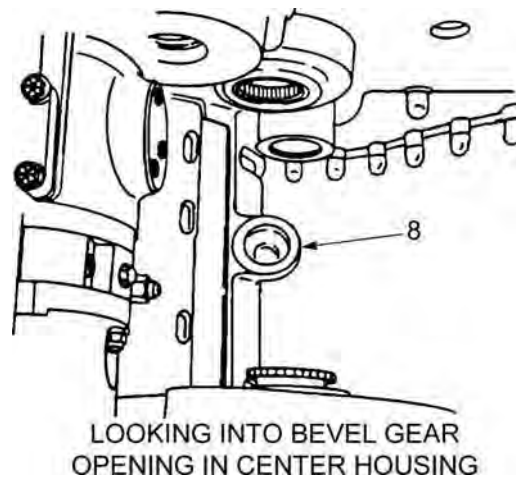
Pedestal on Center Housing Must Align with Machined Boss on Bevel Gear Assembly.
